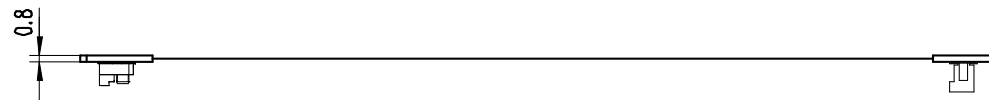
ECU Adapter ETAM8 (Side View)
